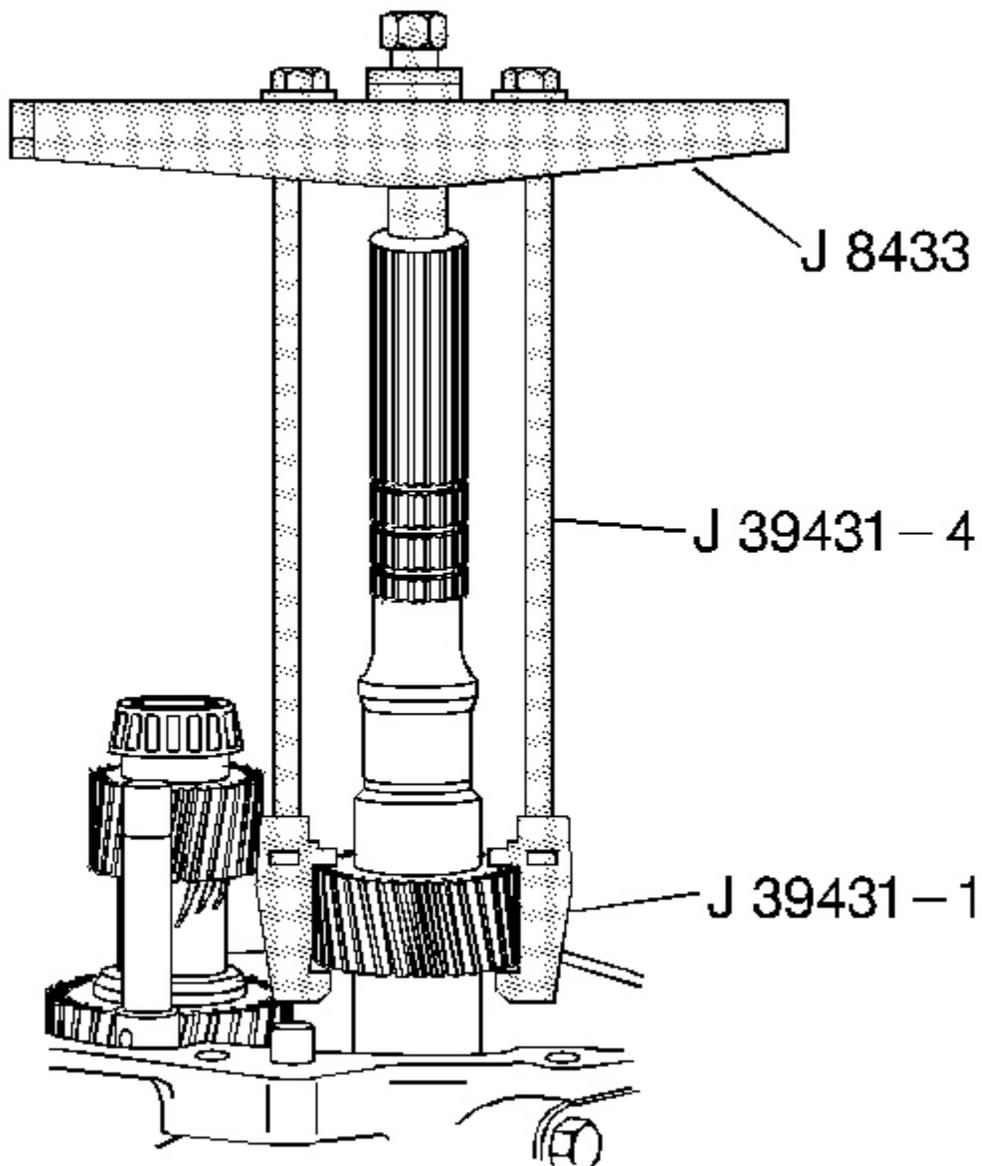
Removing 5th/6th Speed Driven Gear Using J 8433, J 39431-4 & J 39431-1
